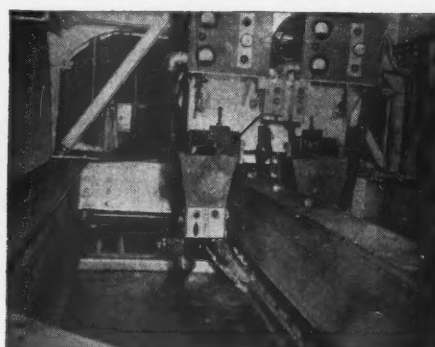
Fillet welding bulb angles and pressed channel side sills to side sheets using two Automatic "Lincolnweld" heads to complete welds on both sides in one pass.
